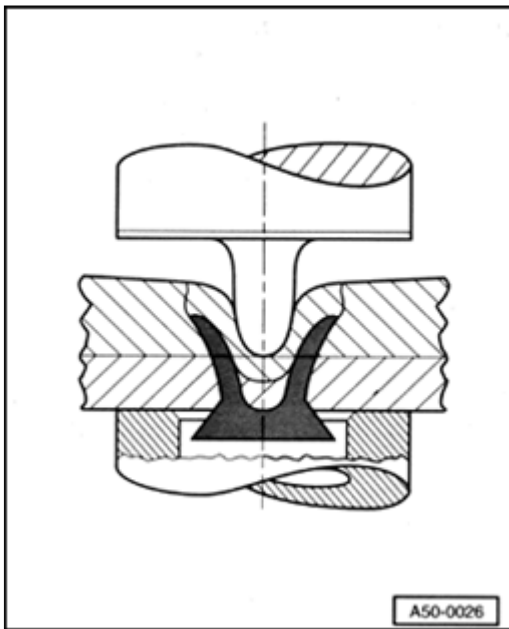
Inserting Tip Of Die In Imprint In Panel
